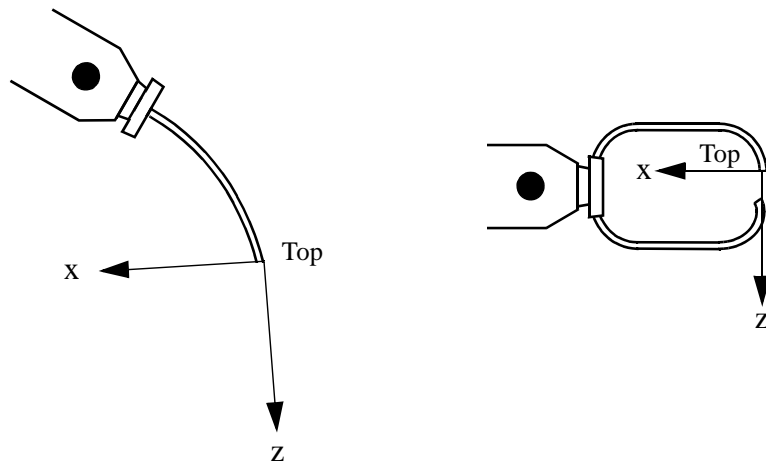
Tool coordinate system, as usually defined for an arc-welding gun (left) and a spot welding gun (right).
